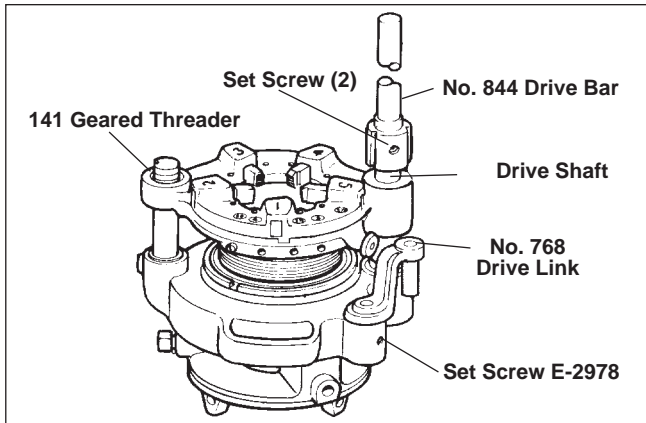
No. 141 Geared Threader with No. 844 Drive Bar Installed
